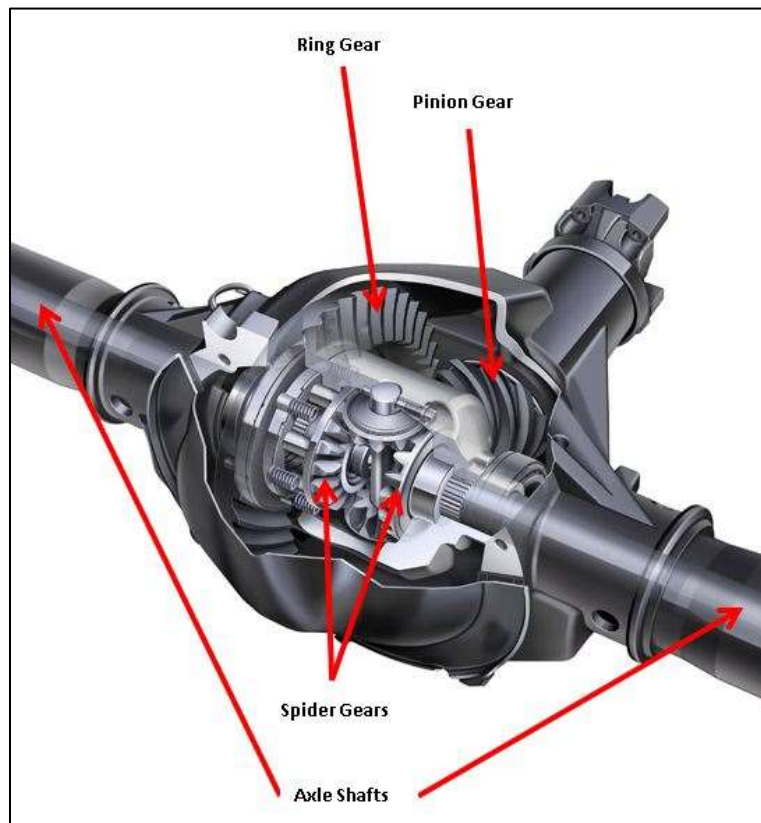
Rear Axle Housing (Cutaway View) Ring, Pinion, and Spider Gears are shown. (Levine, 2009)
